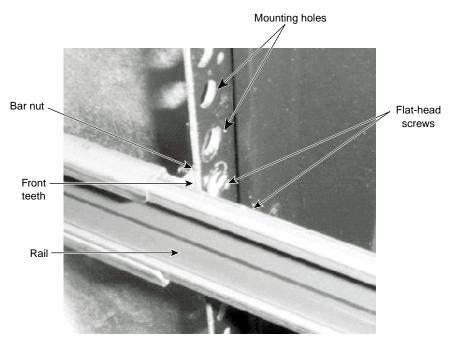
Rail Secured to Front Mounting Rail on Equipment Rack
